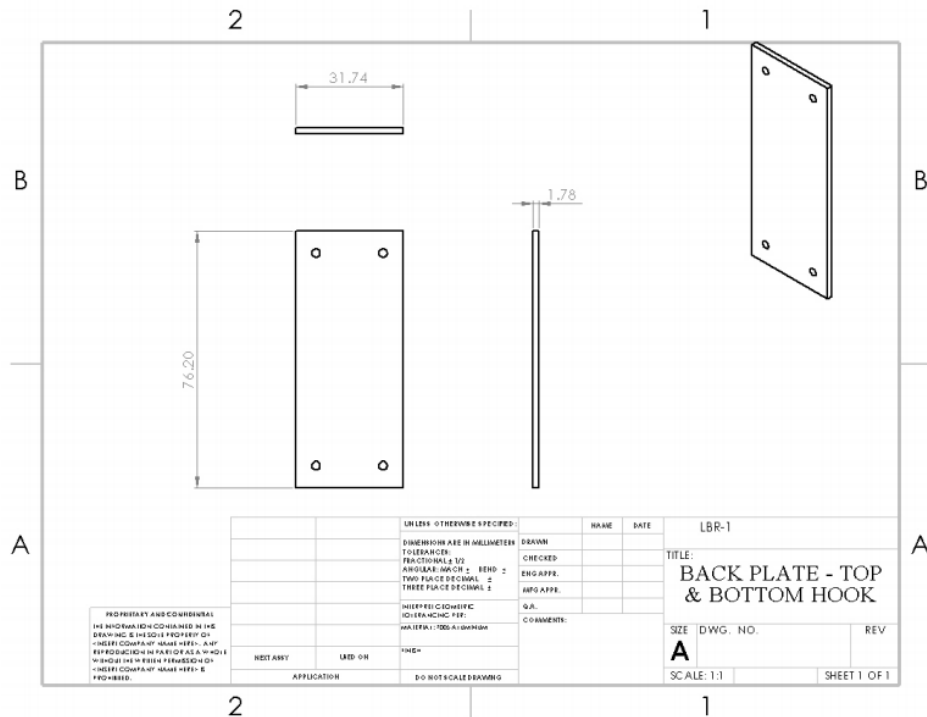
Part drawing of the back plate for the lifting and climbing hooks.
